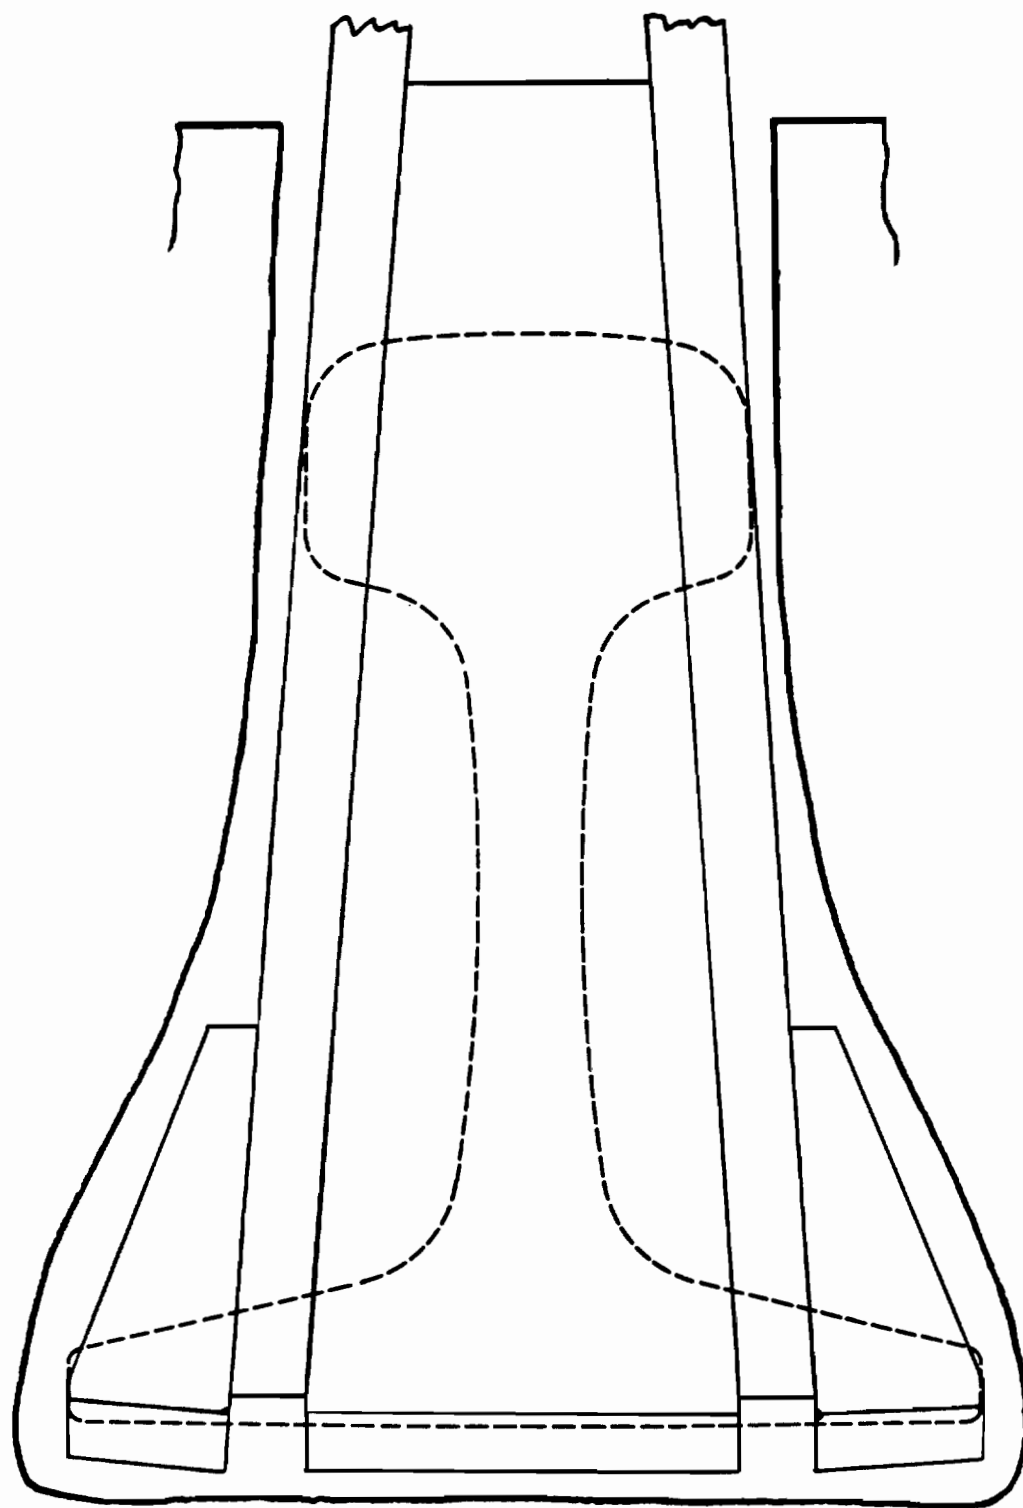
GUIDE TUBE POSITION RELATIVE TO THE RAIL AND MOLD CAVITY PROFILE.
